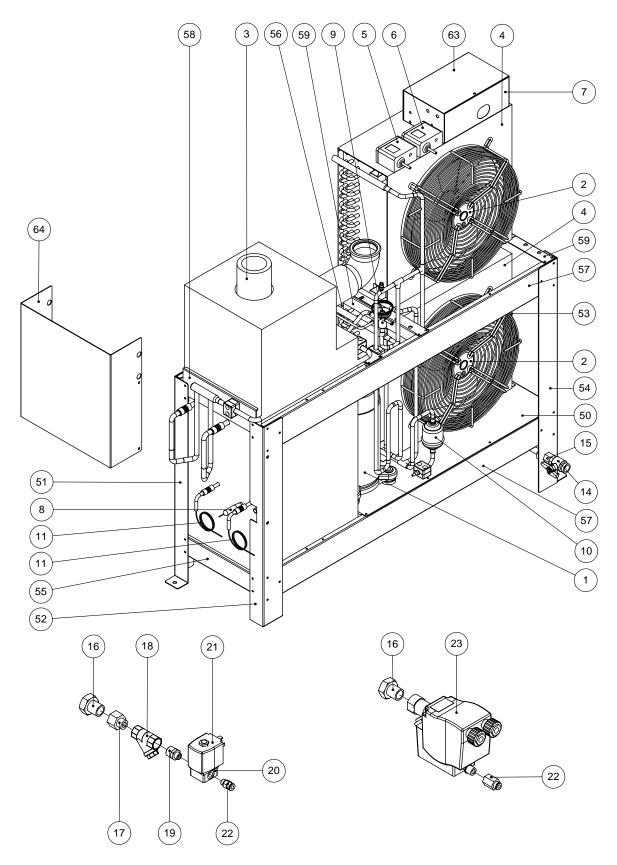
EXPLODED VIEW VS45, VS50 & VS70 DRYER MODULE
